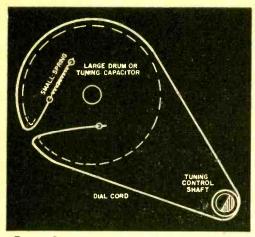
Basic technique for replacing worn or broken dial cord. Special stringing arrangements may involve reference to service books.
